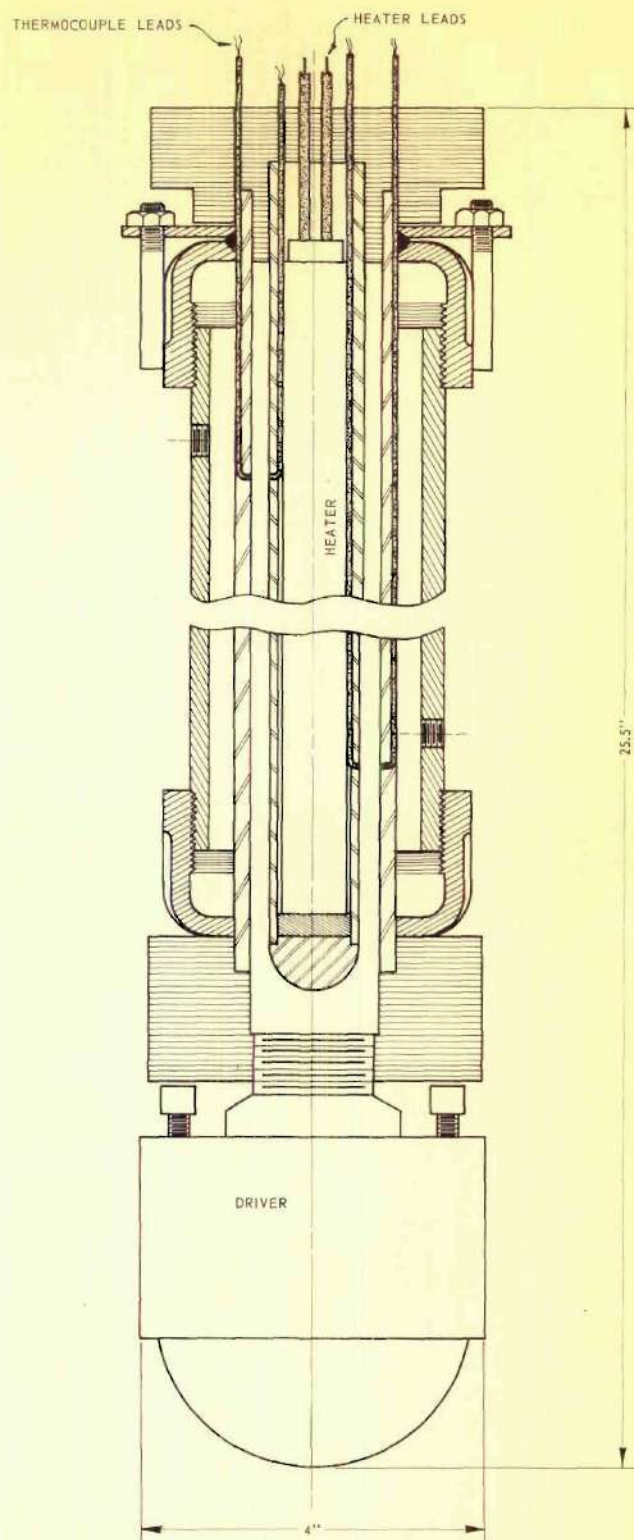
ASSEMBLY DRAWING OF APPARATUS.
